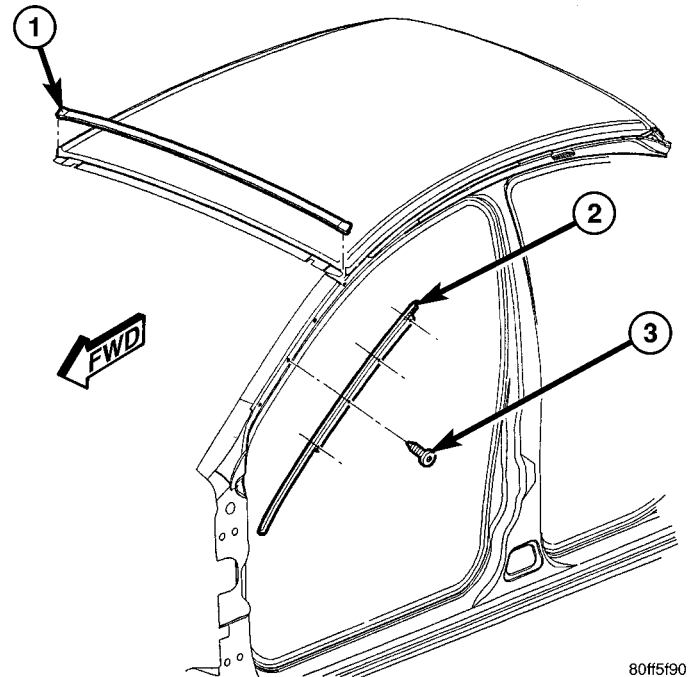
WINDSHIELD HEADER OUTSIDE MOLDING
